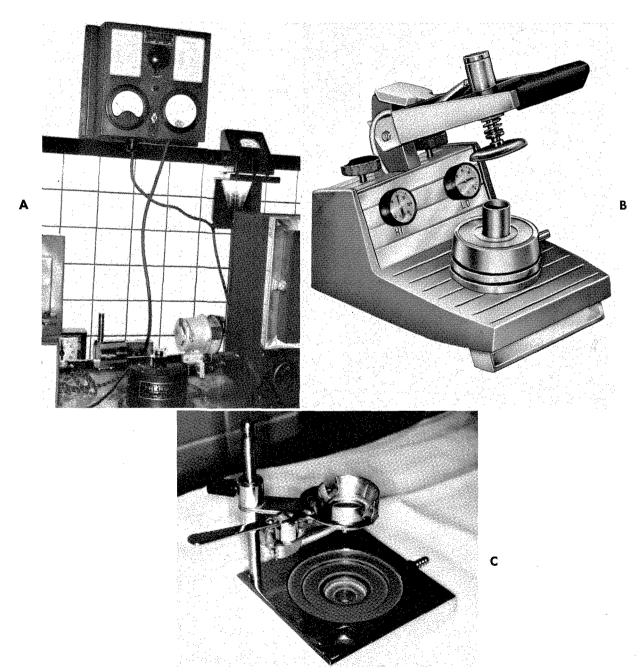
Types of casting machines in general use. A, Jelenko Thermotrol. B, Whip-Mix Tri-caster. C, Schmitz Vac-O-Cast.
